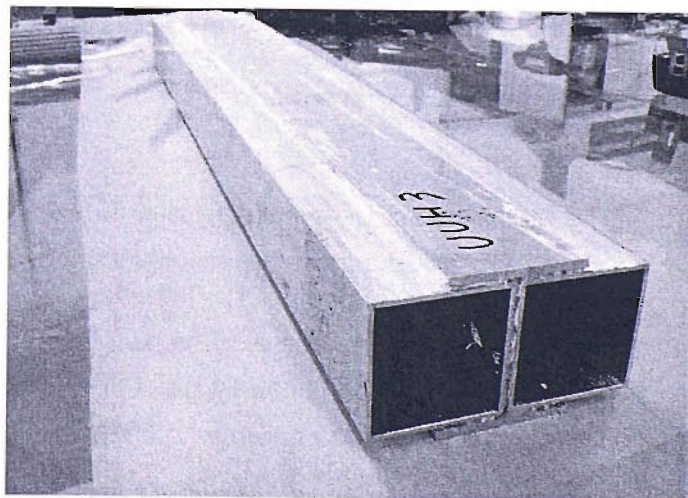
Aluminium-to-aluminium connection beam to be cut into 5 specimens
